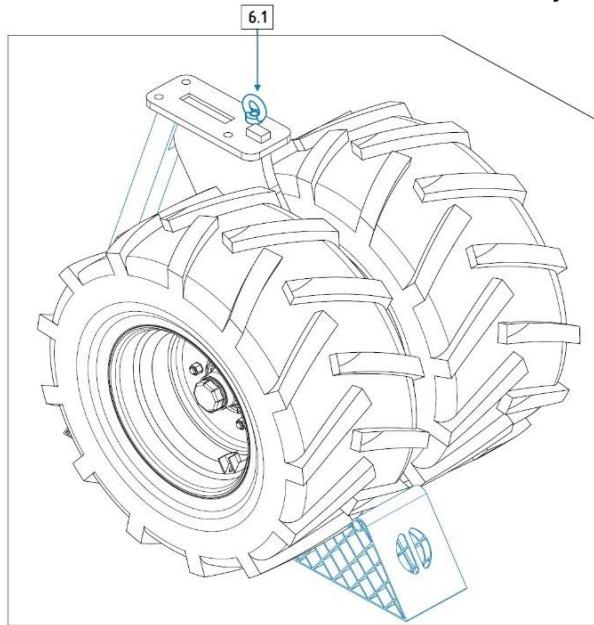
Lifting the wheel assembly with an eye bolt/nut
